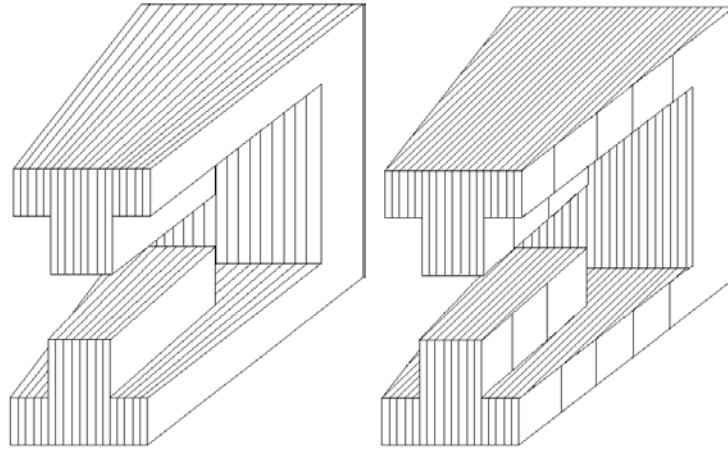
Stator Tooth & Back Iron Construction: Flat and Wedge Shape Laminations
